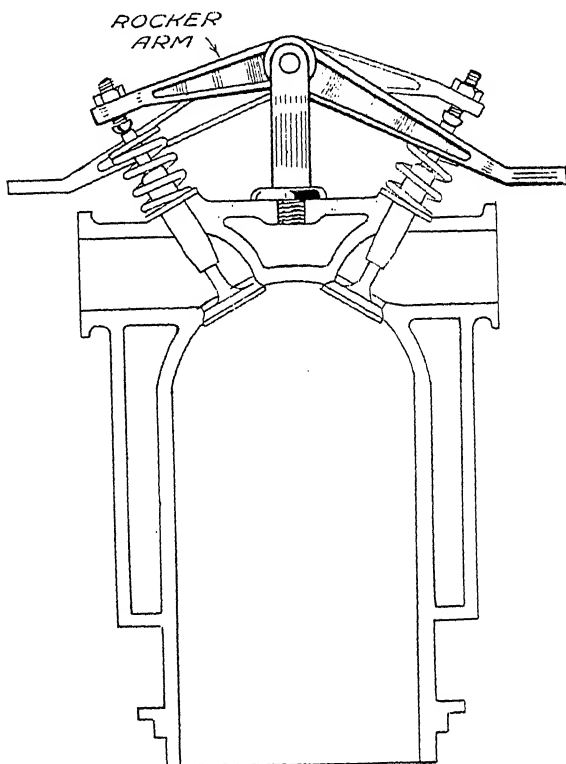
CYLINDER ASSEMBLY SHOWING ROCKER ARM.
